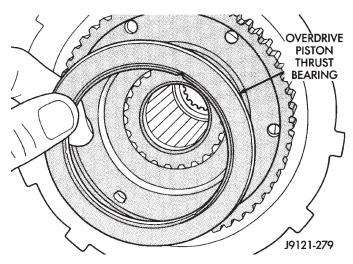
Removing/Installing Overdrive Piston Thrust Bearing
